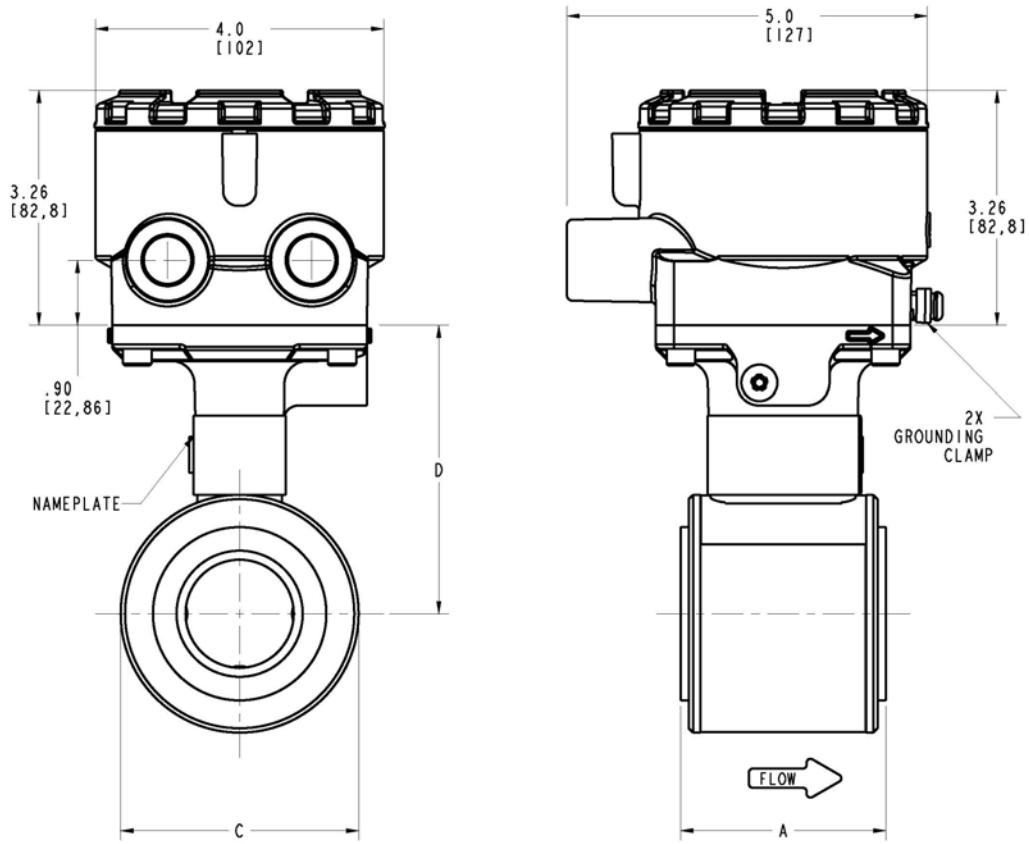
8705-M Flanged Sensor 1/2-in. to 36-in. (DN 15mm to 900mm) ground rings—(P ≤ Class 900)
